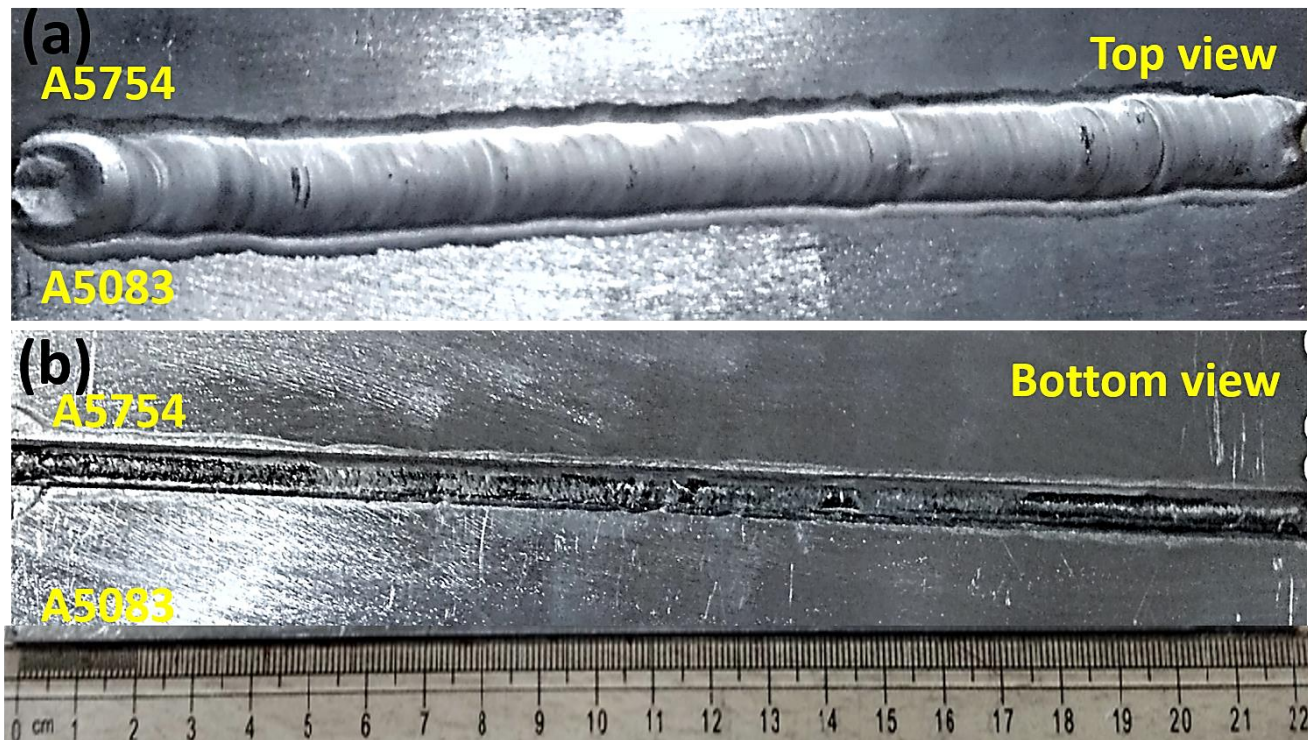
Surface appearance of the TIG welded A5754 and A5083 joint using ER5356:
